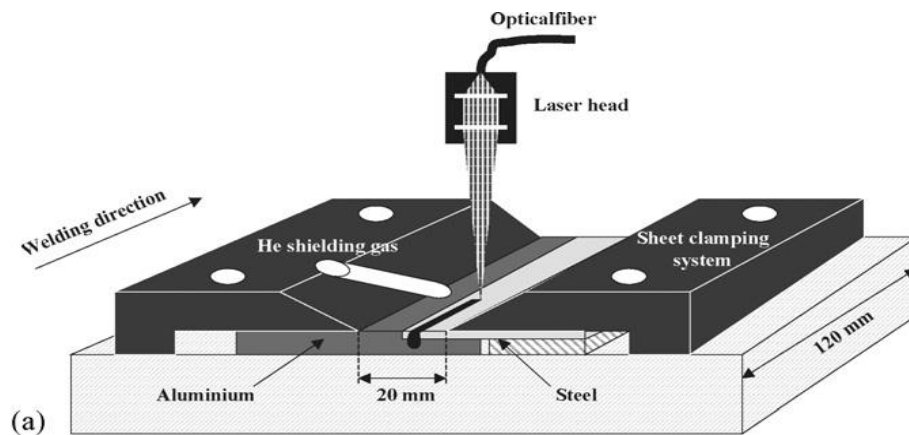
Schematic of keyhole laser welding set up [20]
